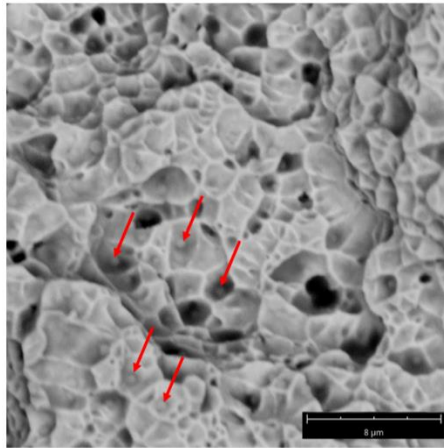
Fracture surface of SG 316L sample of SG samples
